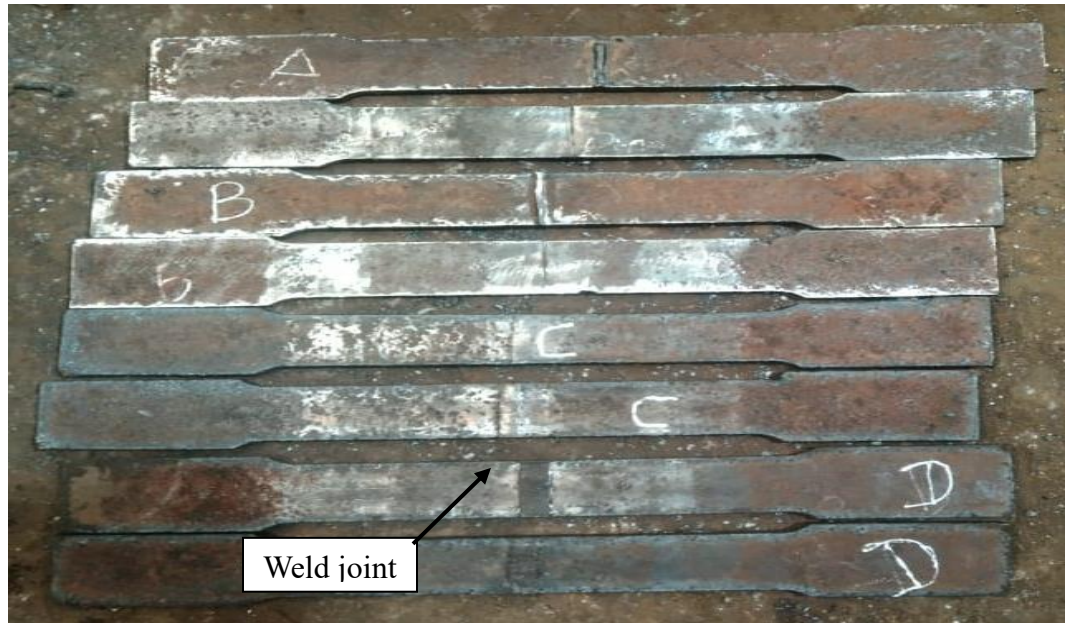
Cutting of welded sample by flame cutting in CNC machine
